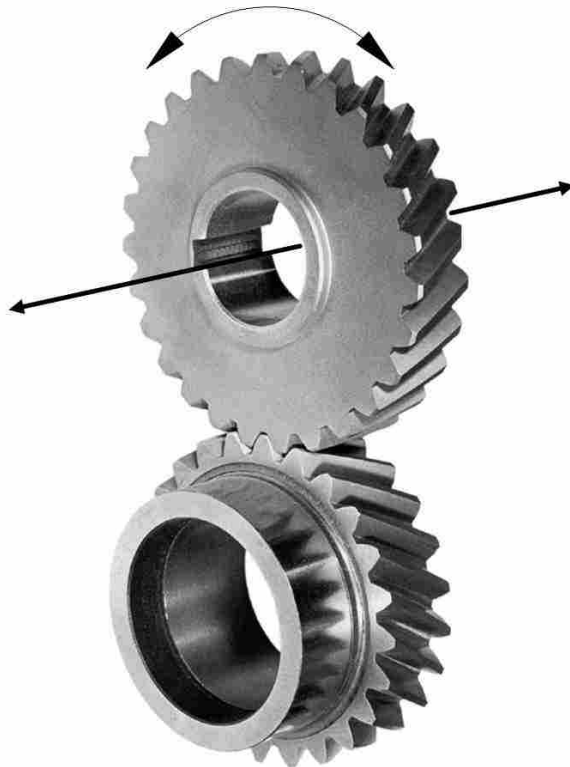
Drive Gear Correction using Electric Actuator
